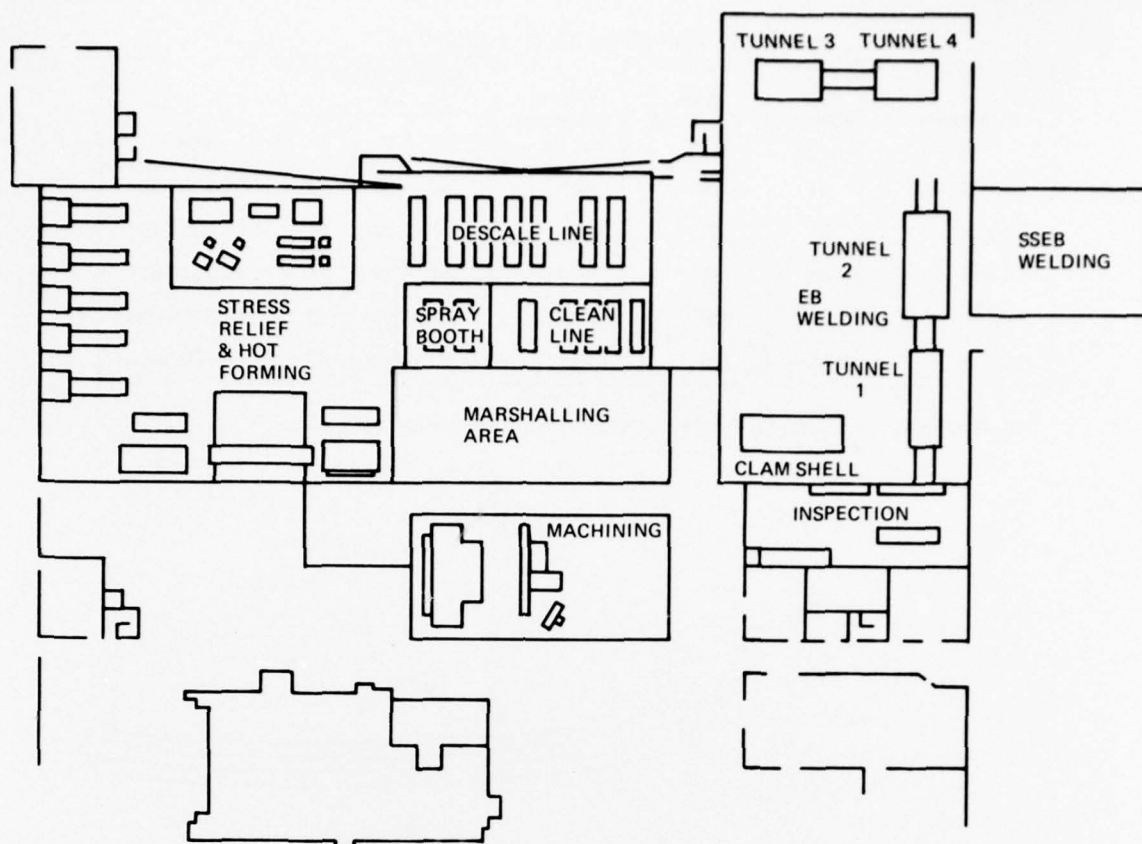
Electron-Beam Welding and Related Facilities
